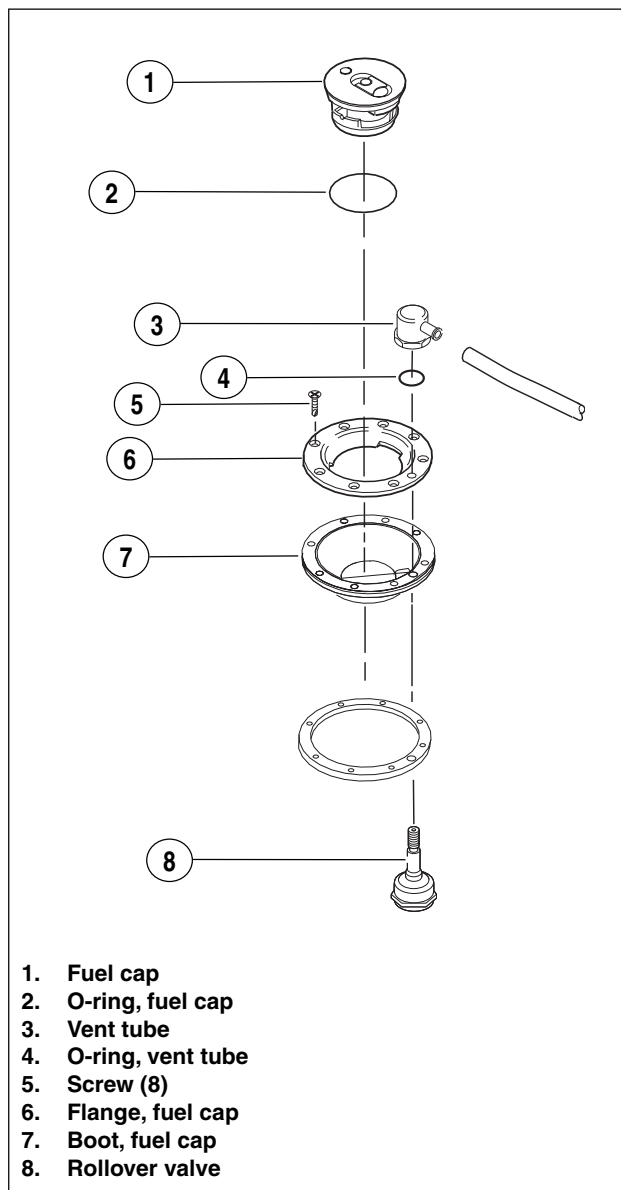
Rollover Valve And Fuel Cap Assembly
